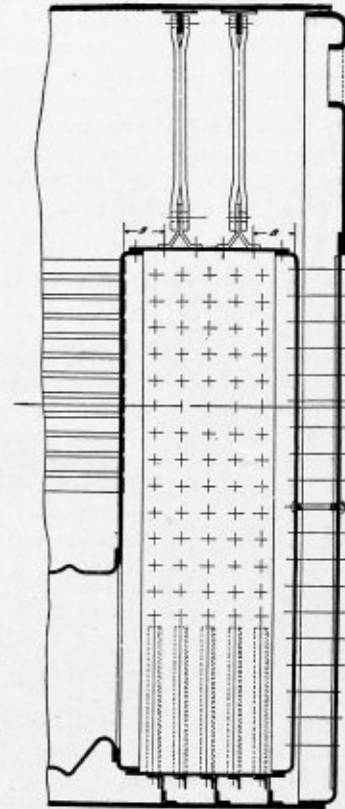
GIRDERS OMITTED, SLING STAYS CARRY PRACTICALLY ENTIRE LOAD.
